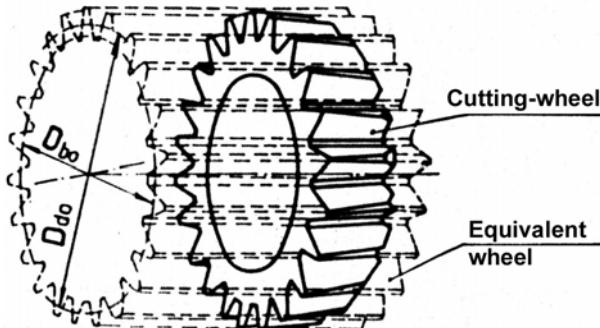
Cutting-wheel tool and the variable equivalent wheel.
